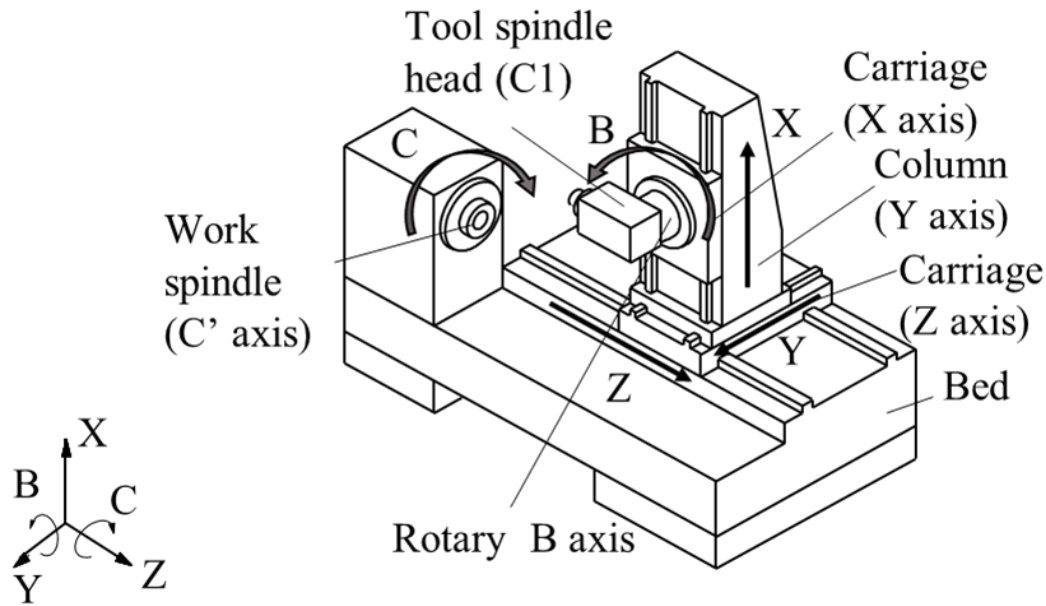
Configuration of a multi-tasking machine tool with a swivel spindle head in a horizontal position.
